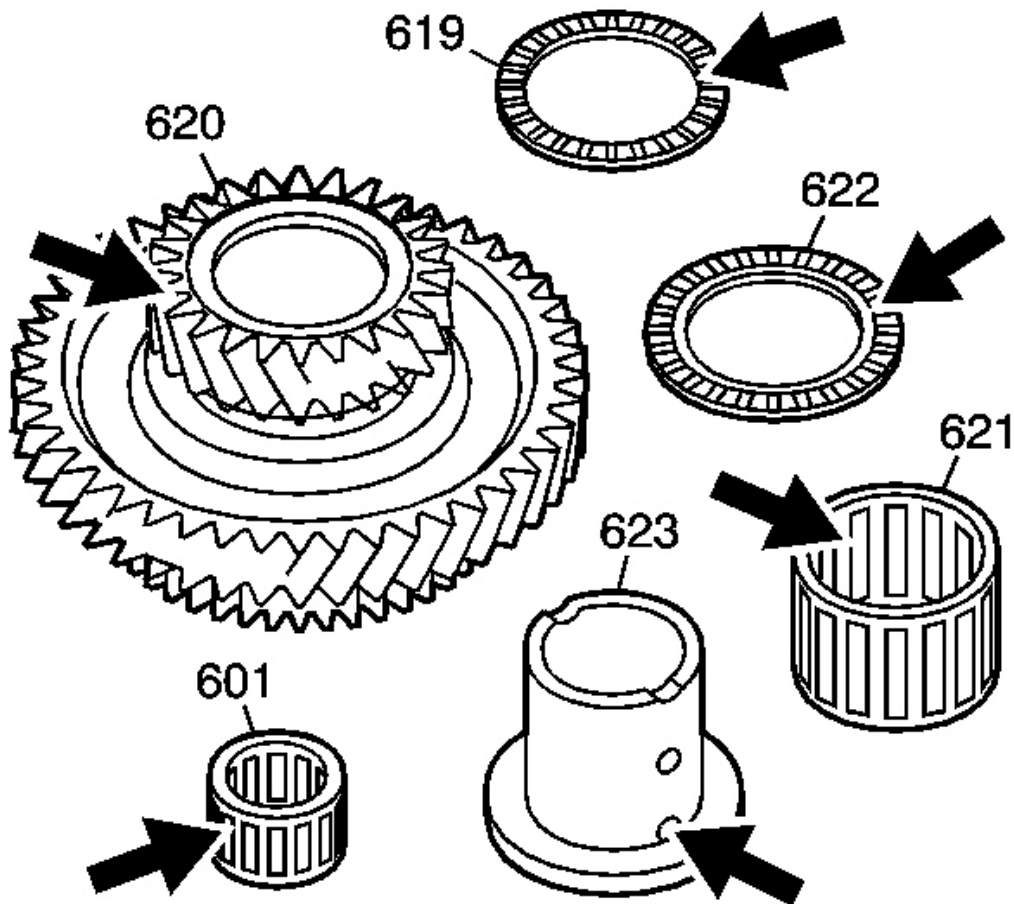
Inspecting 5th/Reverse Drive Gear & Components For Damage
